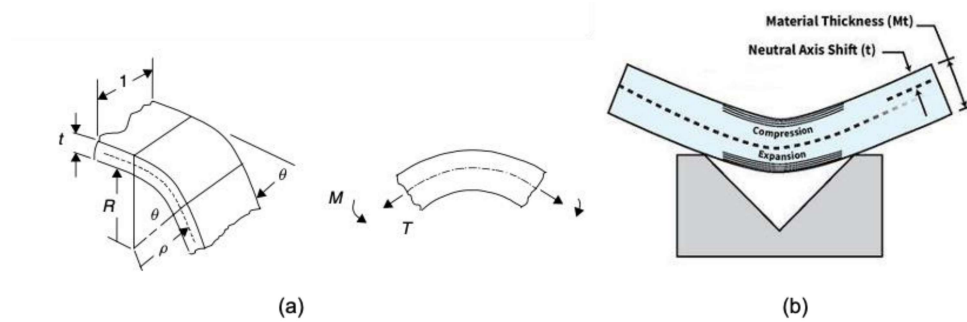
(a) A continuous strip bent along a line [3] (b) Sheet metal bent against a V-die [5].
